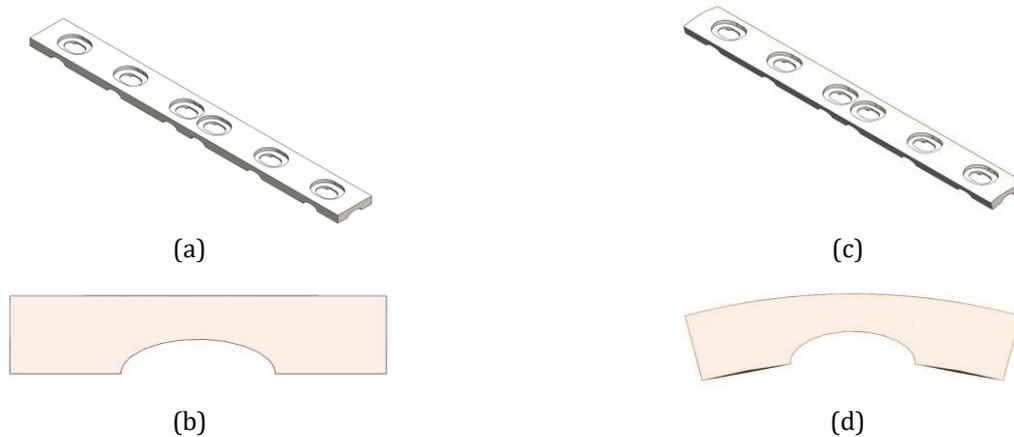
0° compression plate, (a) isometric view; (b) right side view and 30° compression plate, (c) isometric view; (d) right side view
